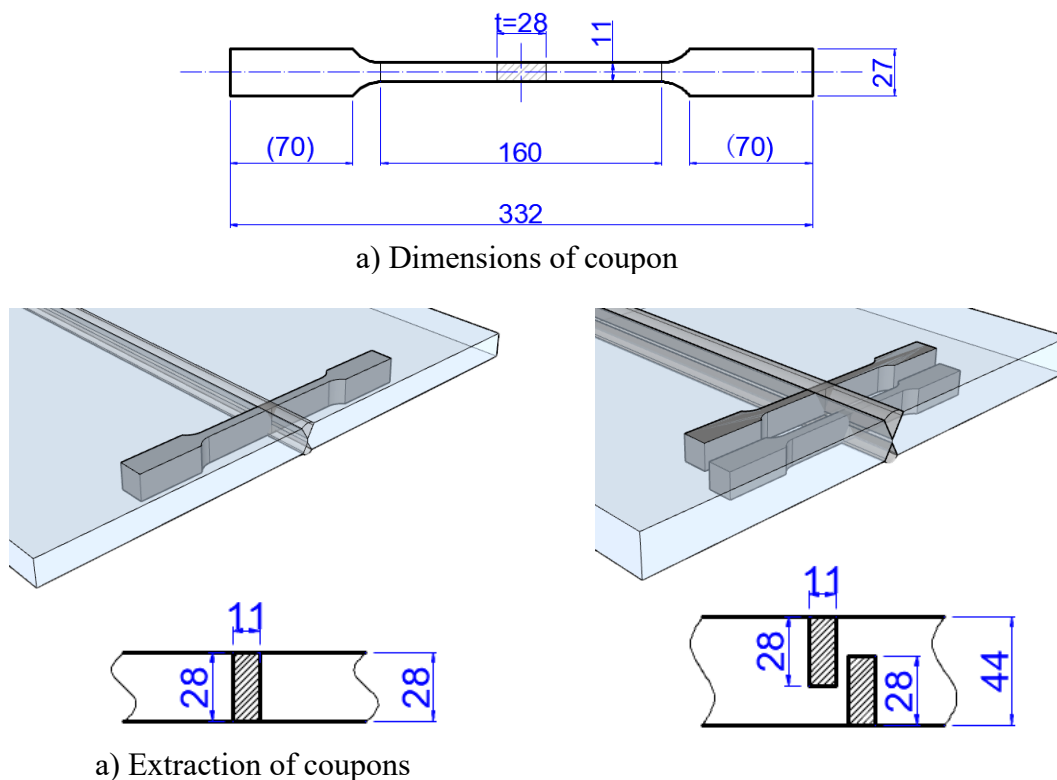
Extraction locations and dimensions of Q620 TM tensile test coupons
